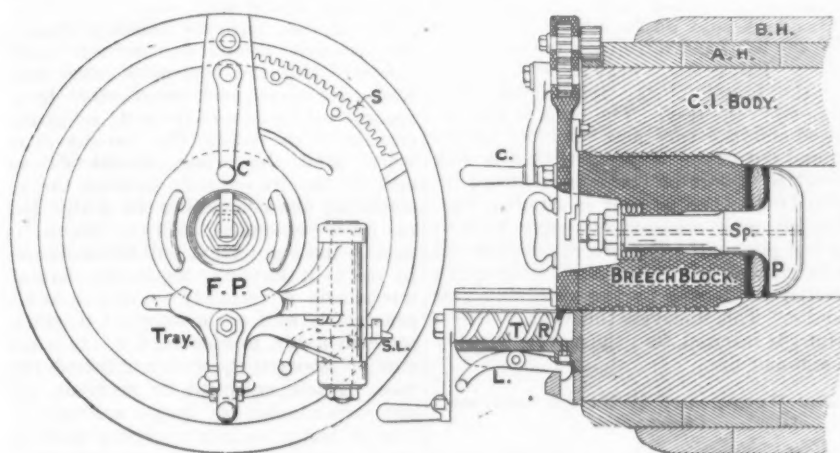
Rear Elevation and Central Longitudinal Section of Breech Loading Mechanism.
